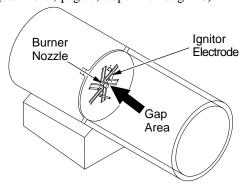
Clearance between Ignitor Electrode and Target Plate
